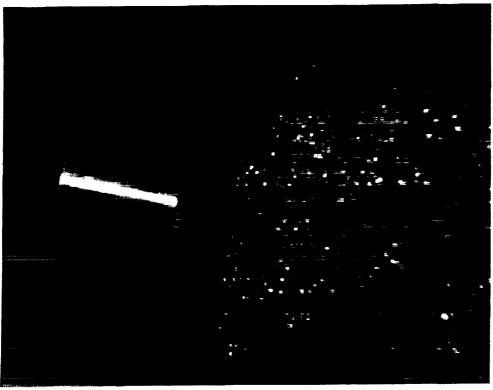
Appearance of Tube Ends After Electroform "Fill" of Tube Bundle Interfaces.
